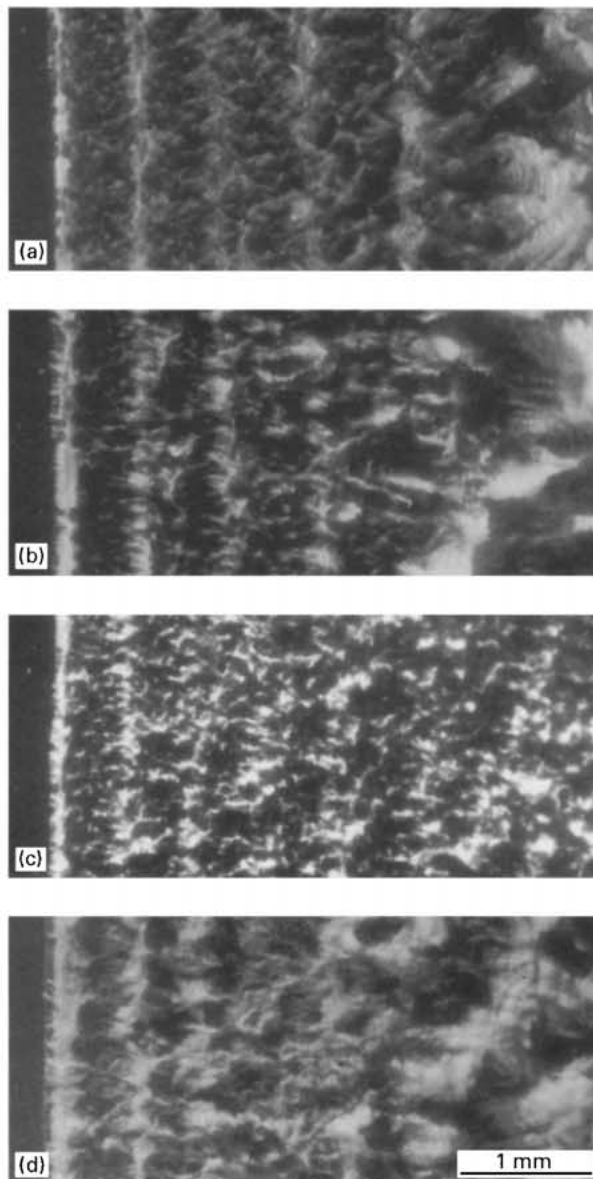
Fracture surfaces of compact tension specimens tested at an initial stress intensity factor of  $1.2 \text{ MPa m}^{1/2}$ : cut from (a) pipe, and compression-moulded (b) fast-cooled, (c) slow-cooled, and (d) quenched plaques.
